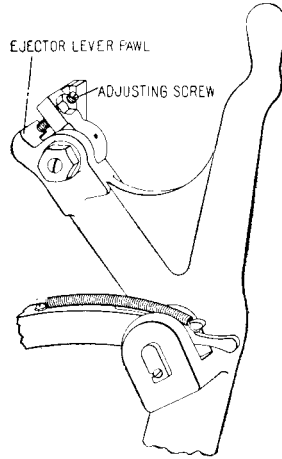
Diagram of the ejector lever and the ejector-lever pawl and screw for adjusting same so that when the cam comes around it will engage with the pawl, driving the ejector lever forward and ejecting the slug.
